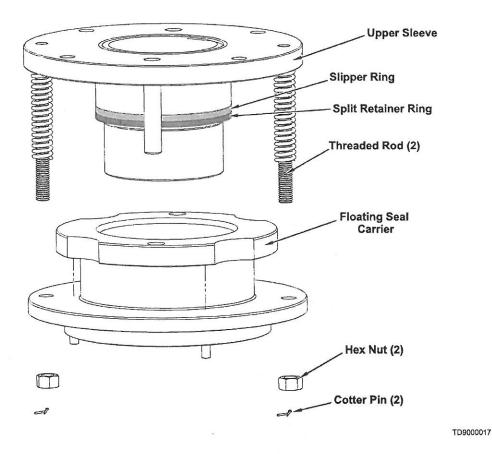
Modified Procedure: Disassembled Floating Seal Assembly
